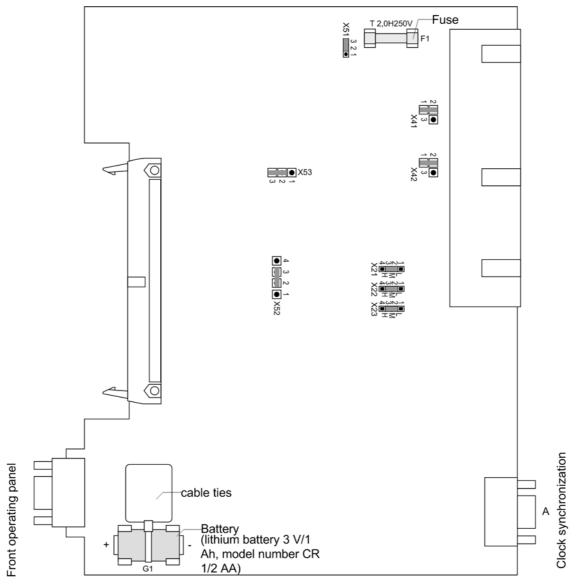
Processor printed circuit board A–CPU for 7SJ689 with jumpers settings required for the module configuration
